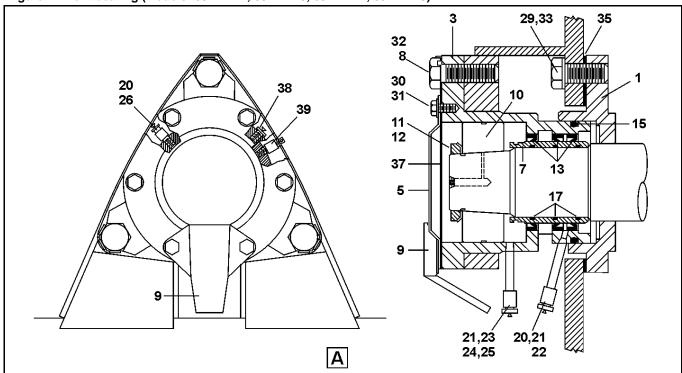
Front bearing (Models: 6044WP2, 6044WP3, 6044WR2, 6044WR3)
